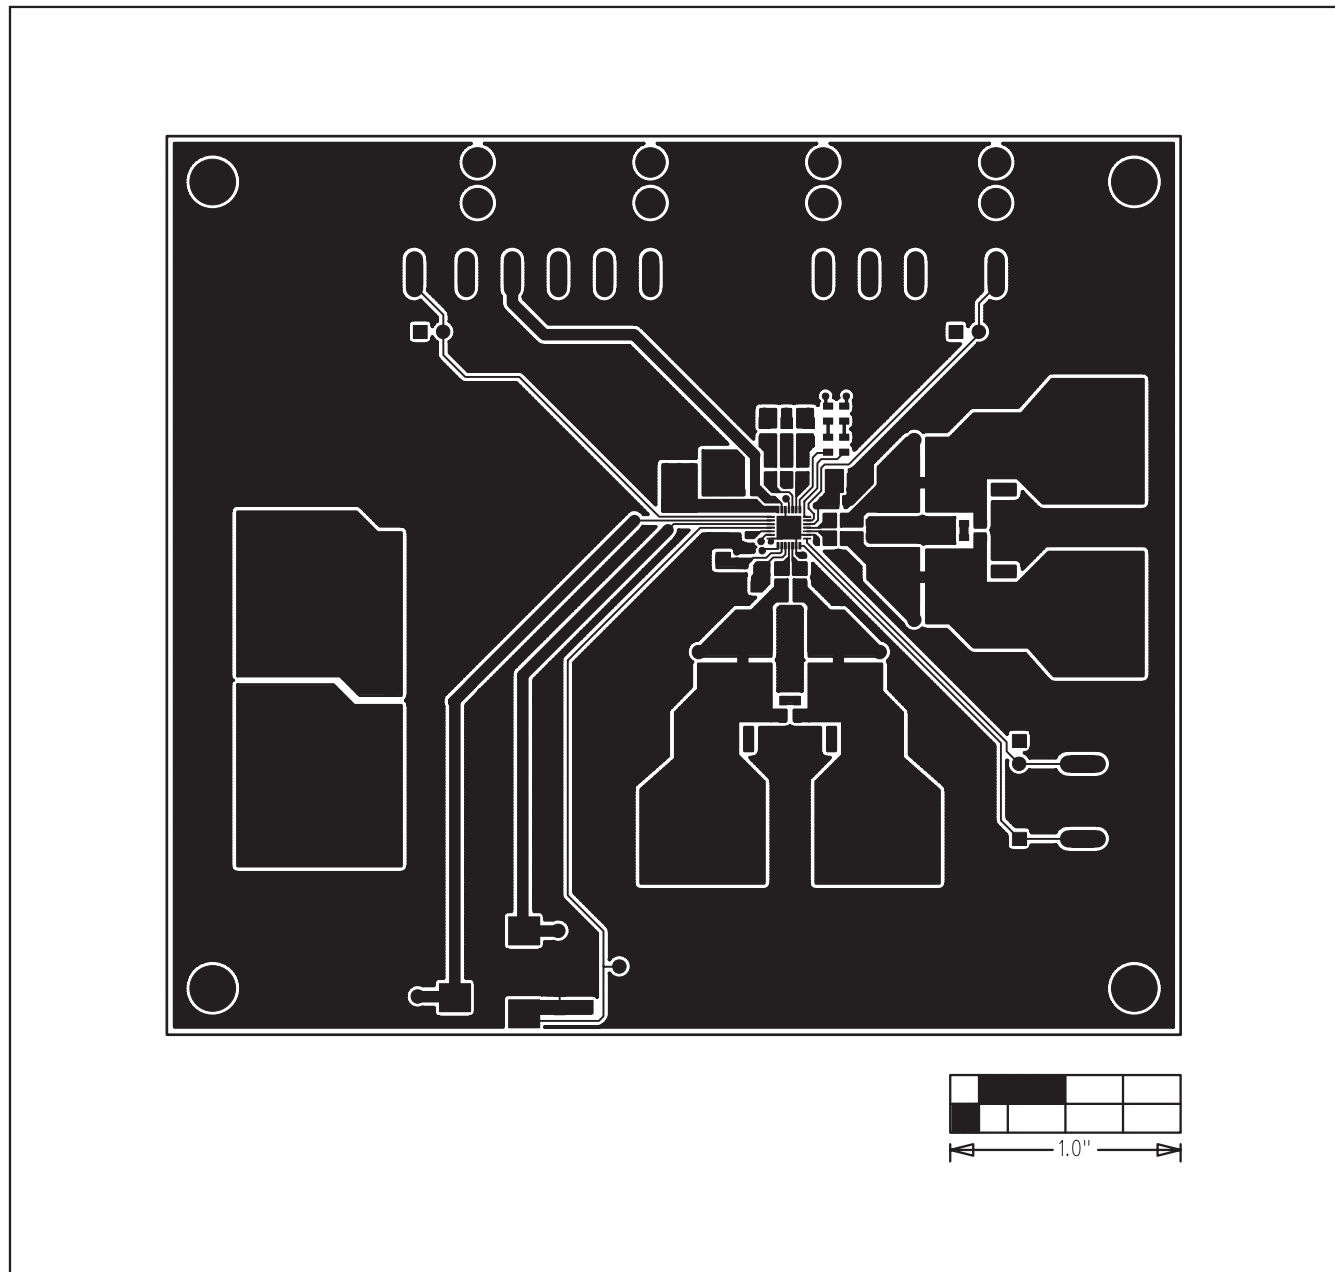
MAX9791A EV Kit PCB Layout—Component Side
